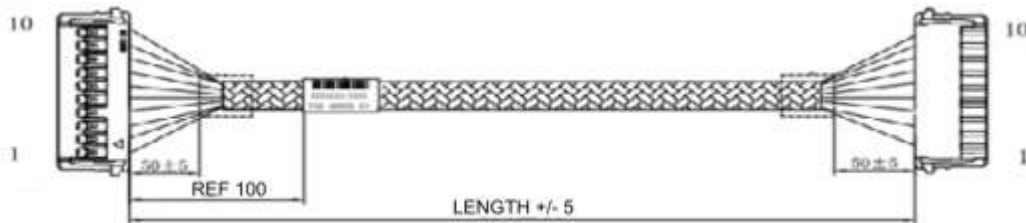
10-pin Cable Drawing (for Central Power operation)
